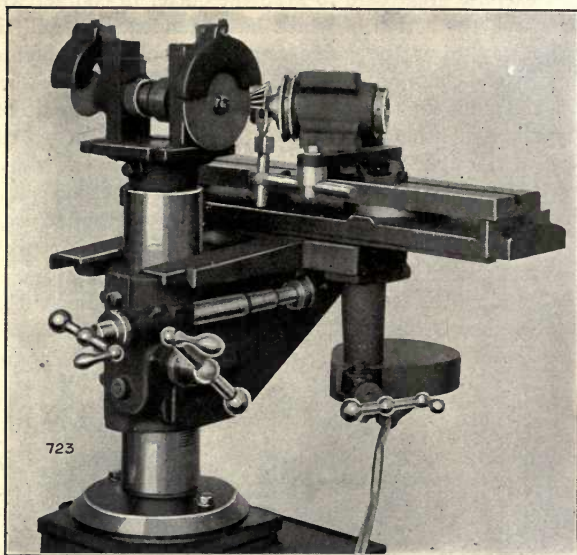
Grinding an angular milling cutter on a Cincinnati grinder.
